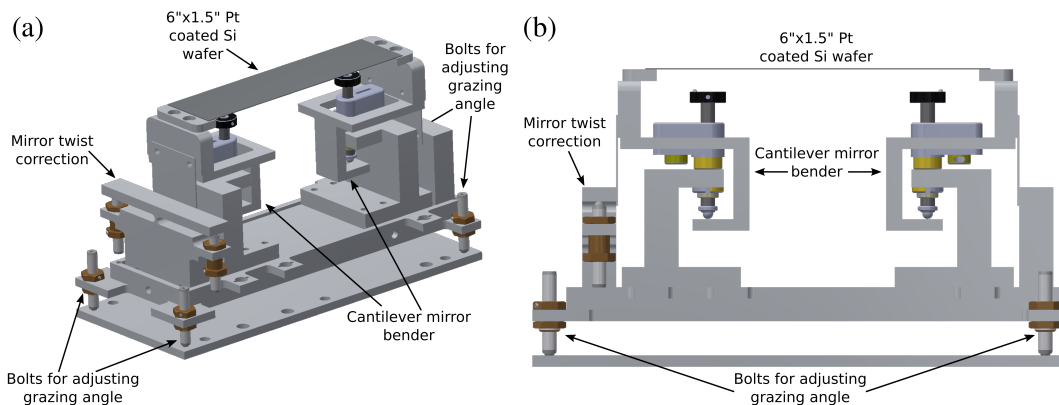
Labelled CAD drawing showing two views of the mirror mount used to support the platinum coated wafer in place, and adjust the grazing angle and the required bending moment to the mirror for focusing.
